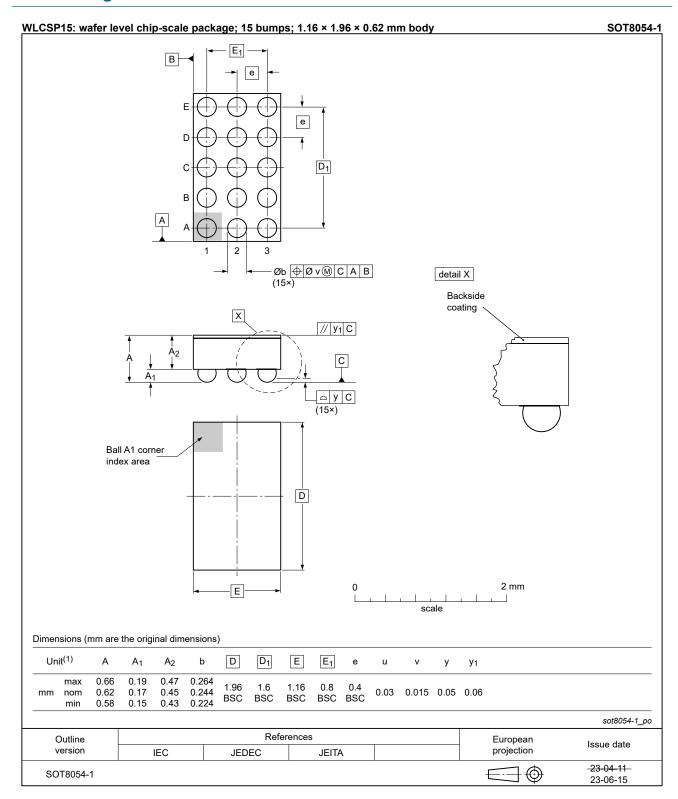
Package outline SOT8054-1 (WLCSP15)
